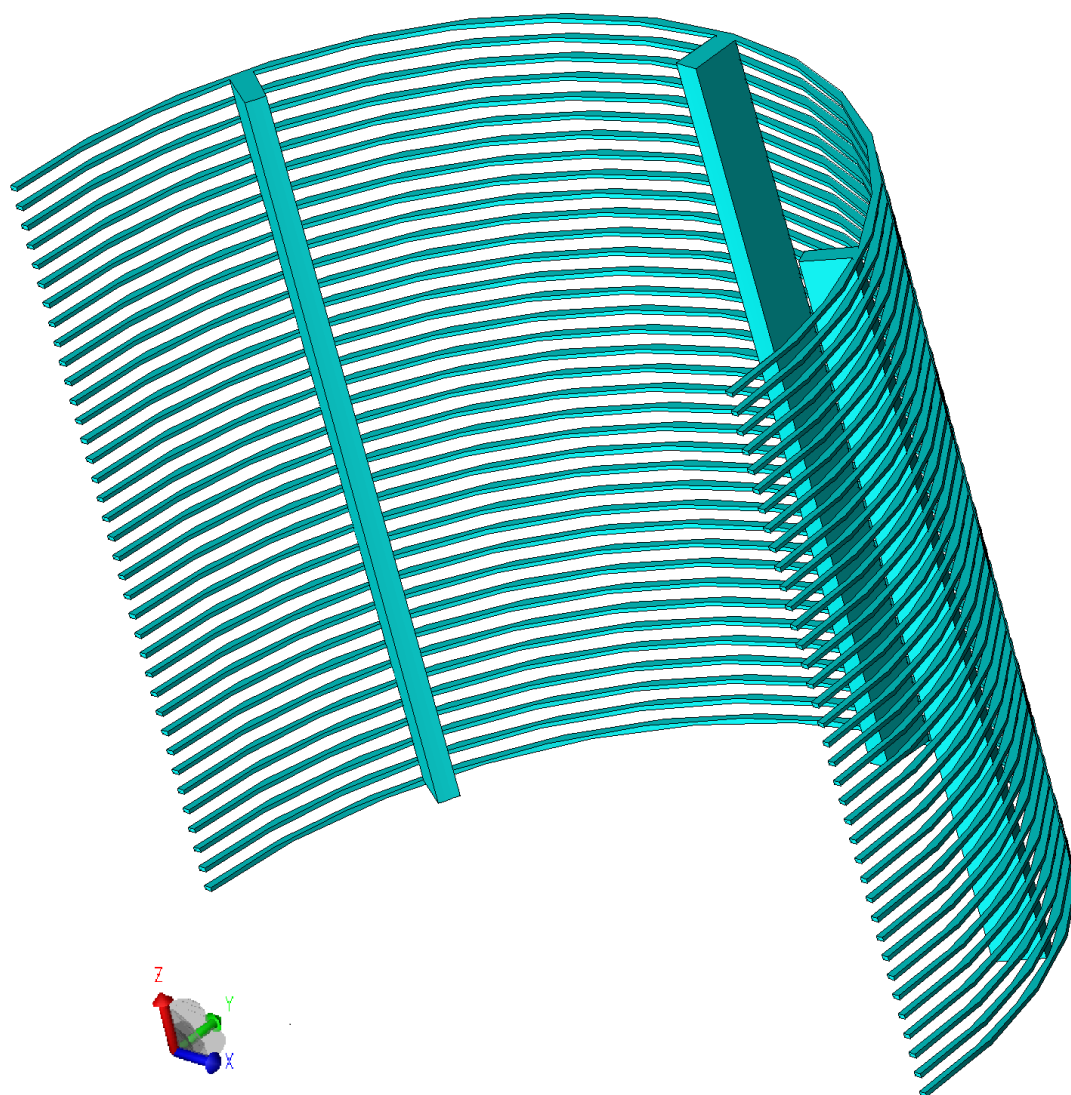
Three dimensional view of the separation cage of the air-cored generator in Chapter 5
